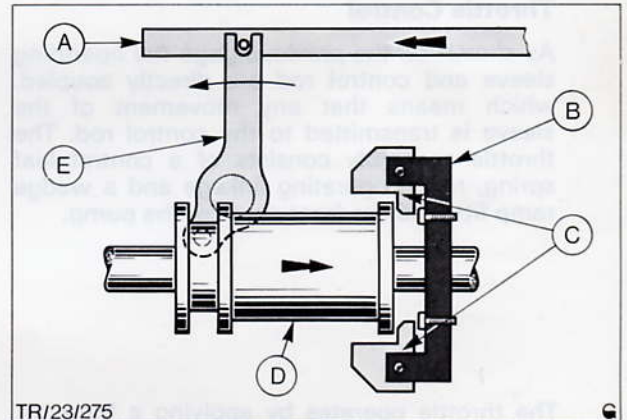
Governor Assembly at full throttle and a low engine rpm (Side elevation)
